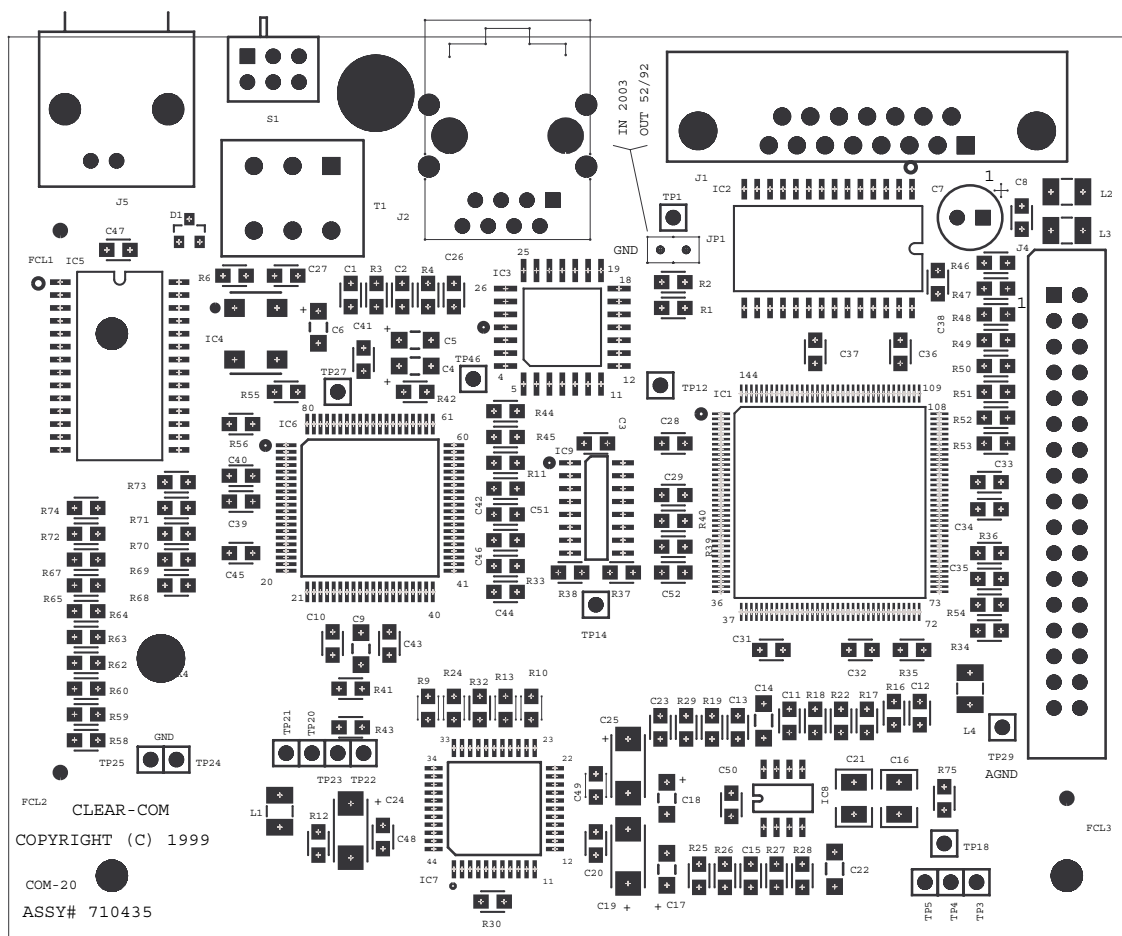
Assembly Drawing—COM-20 Communications PCB Rev.A
